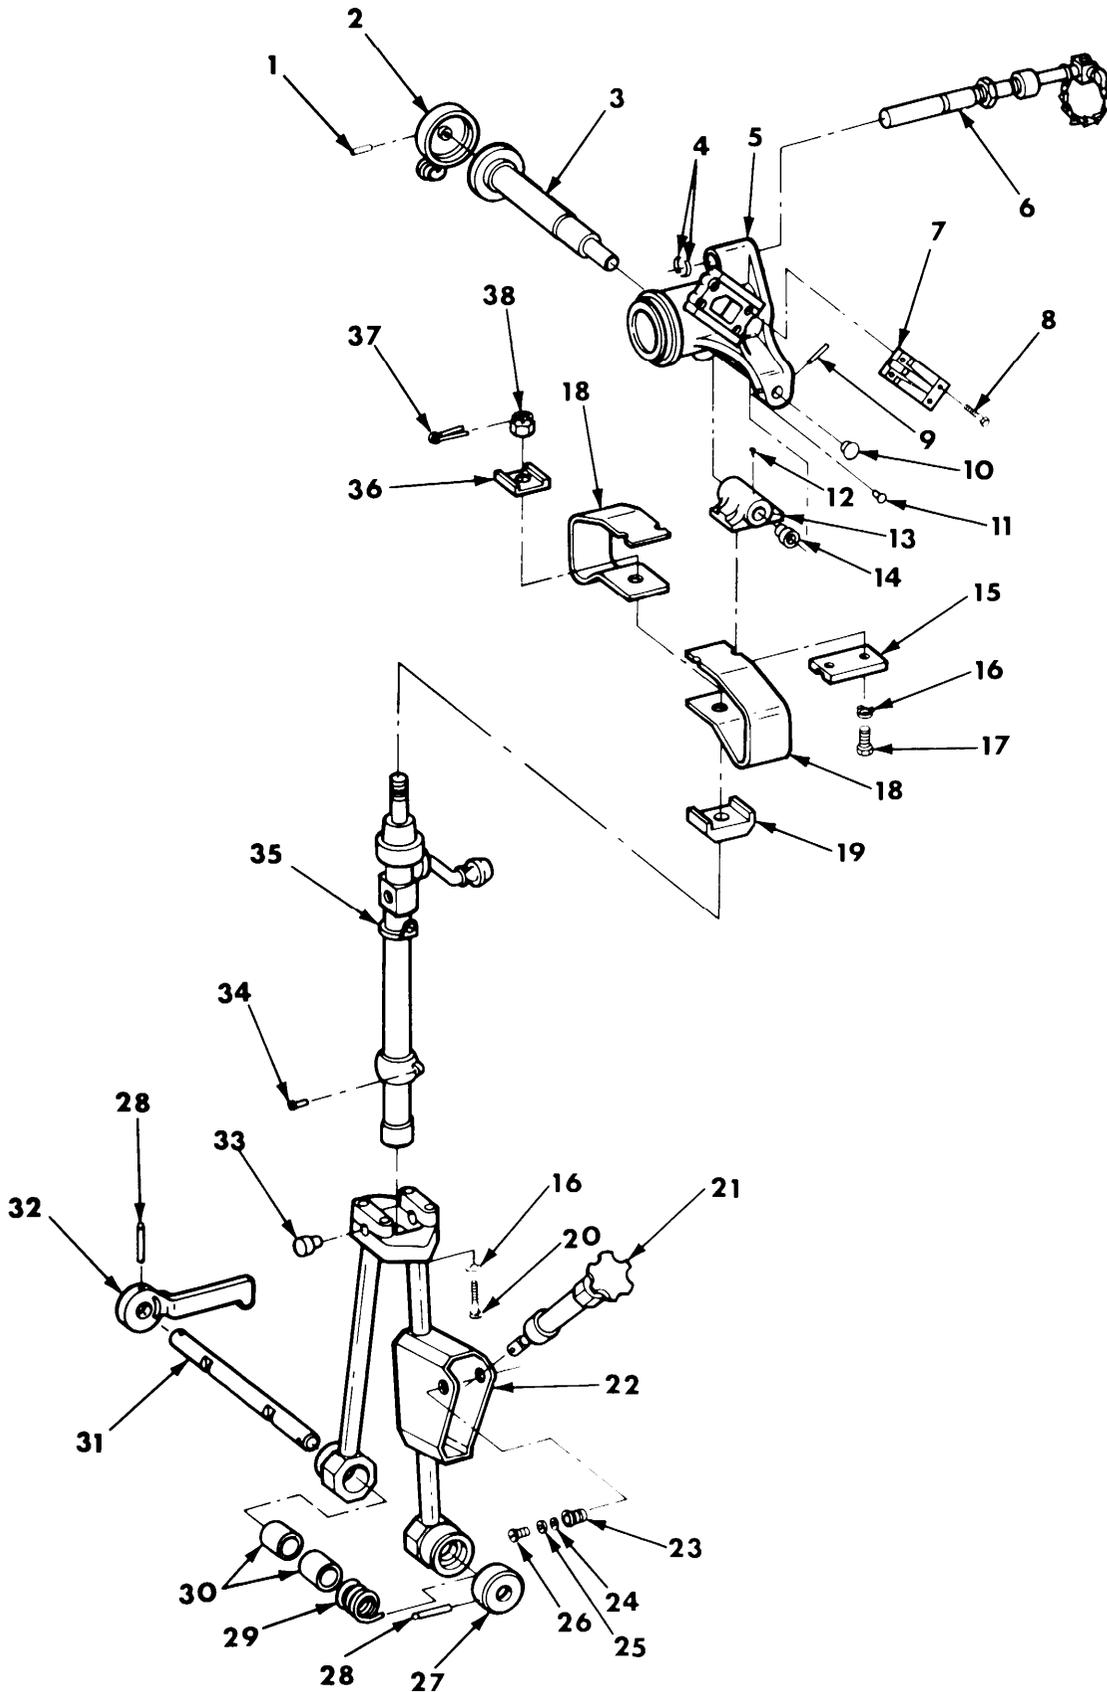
81-mm Mortar Bipod Assembly 10978700.
